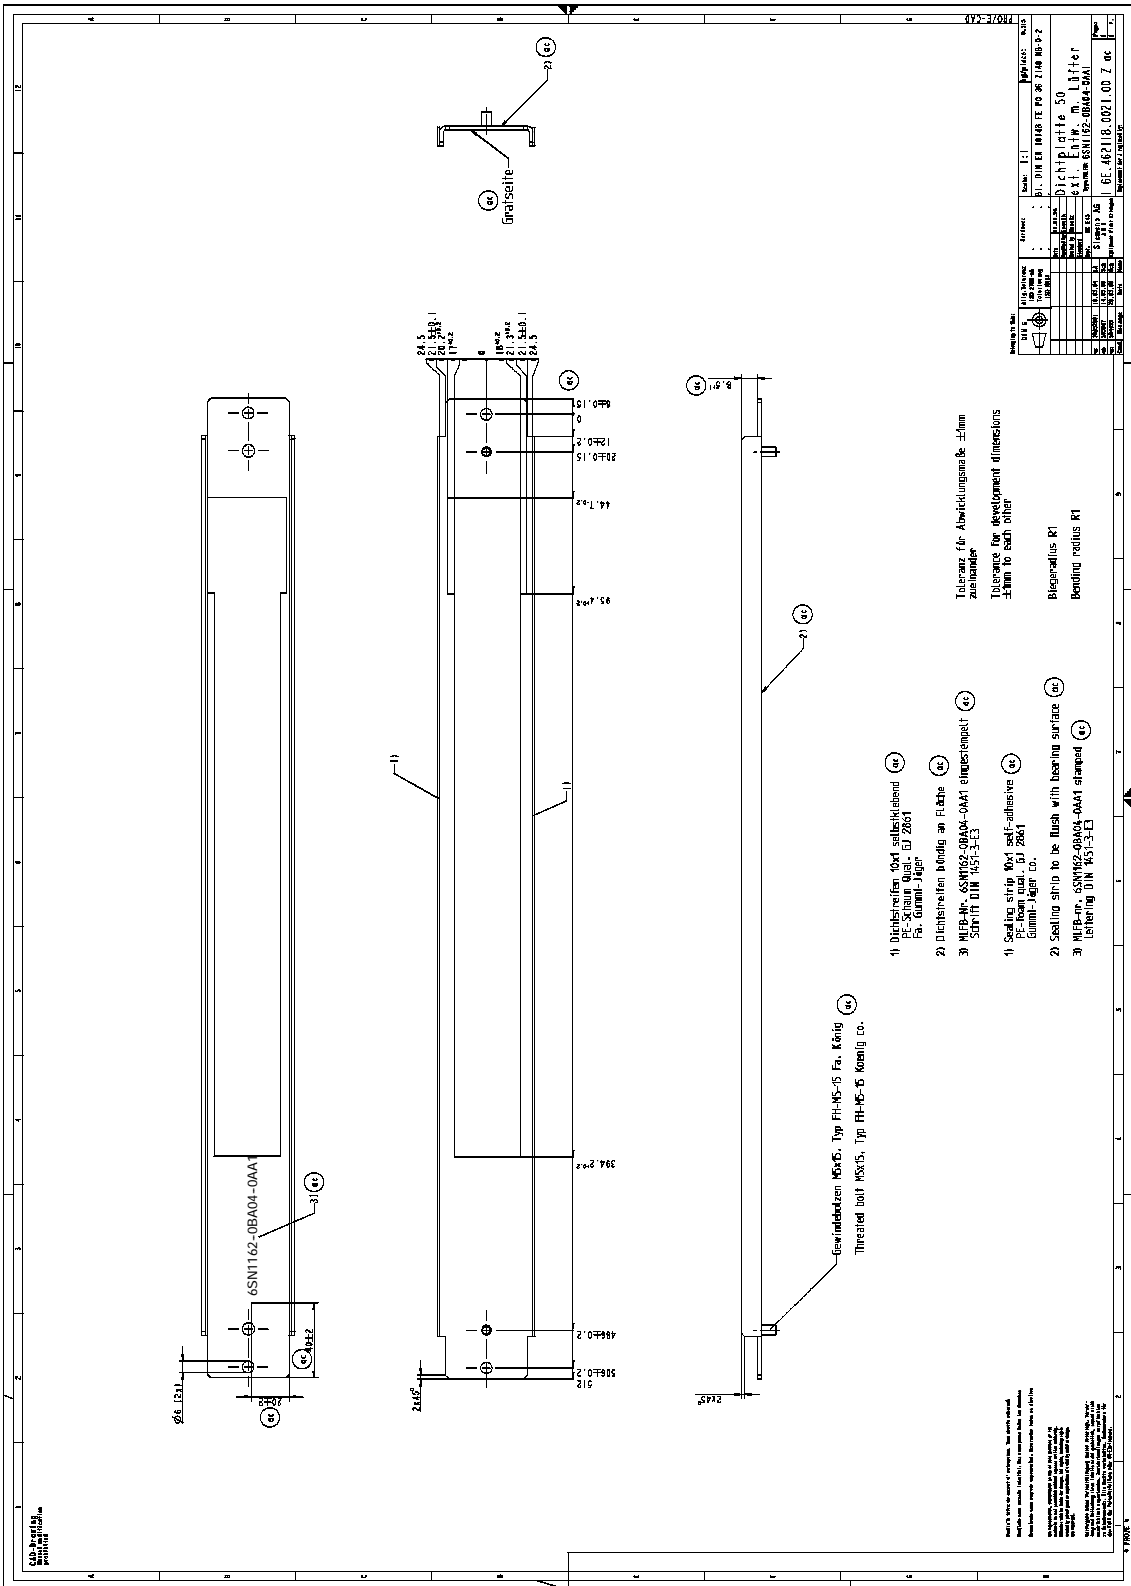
External cooling, mounting frame for cabinet installation module width 50 mm, 6SN1162-0BA04-0AA1
